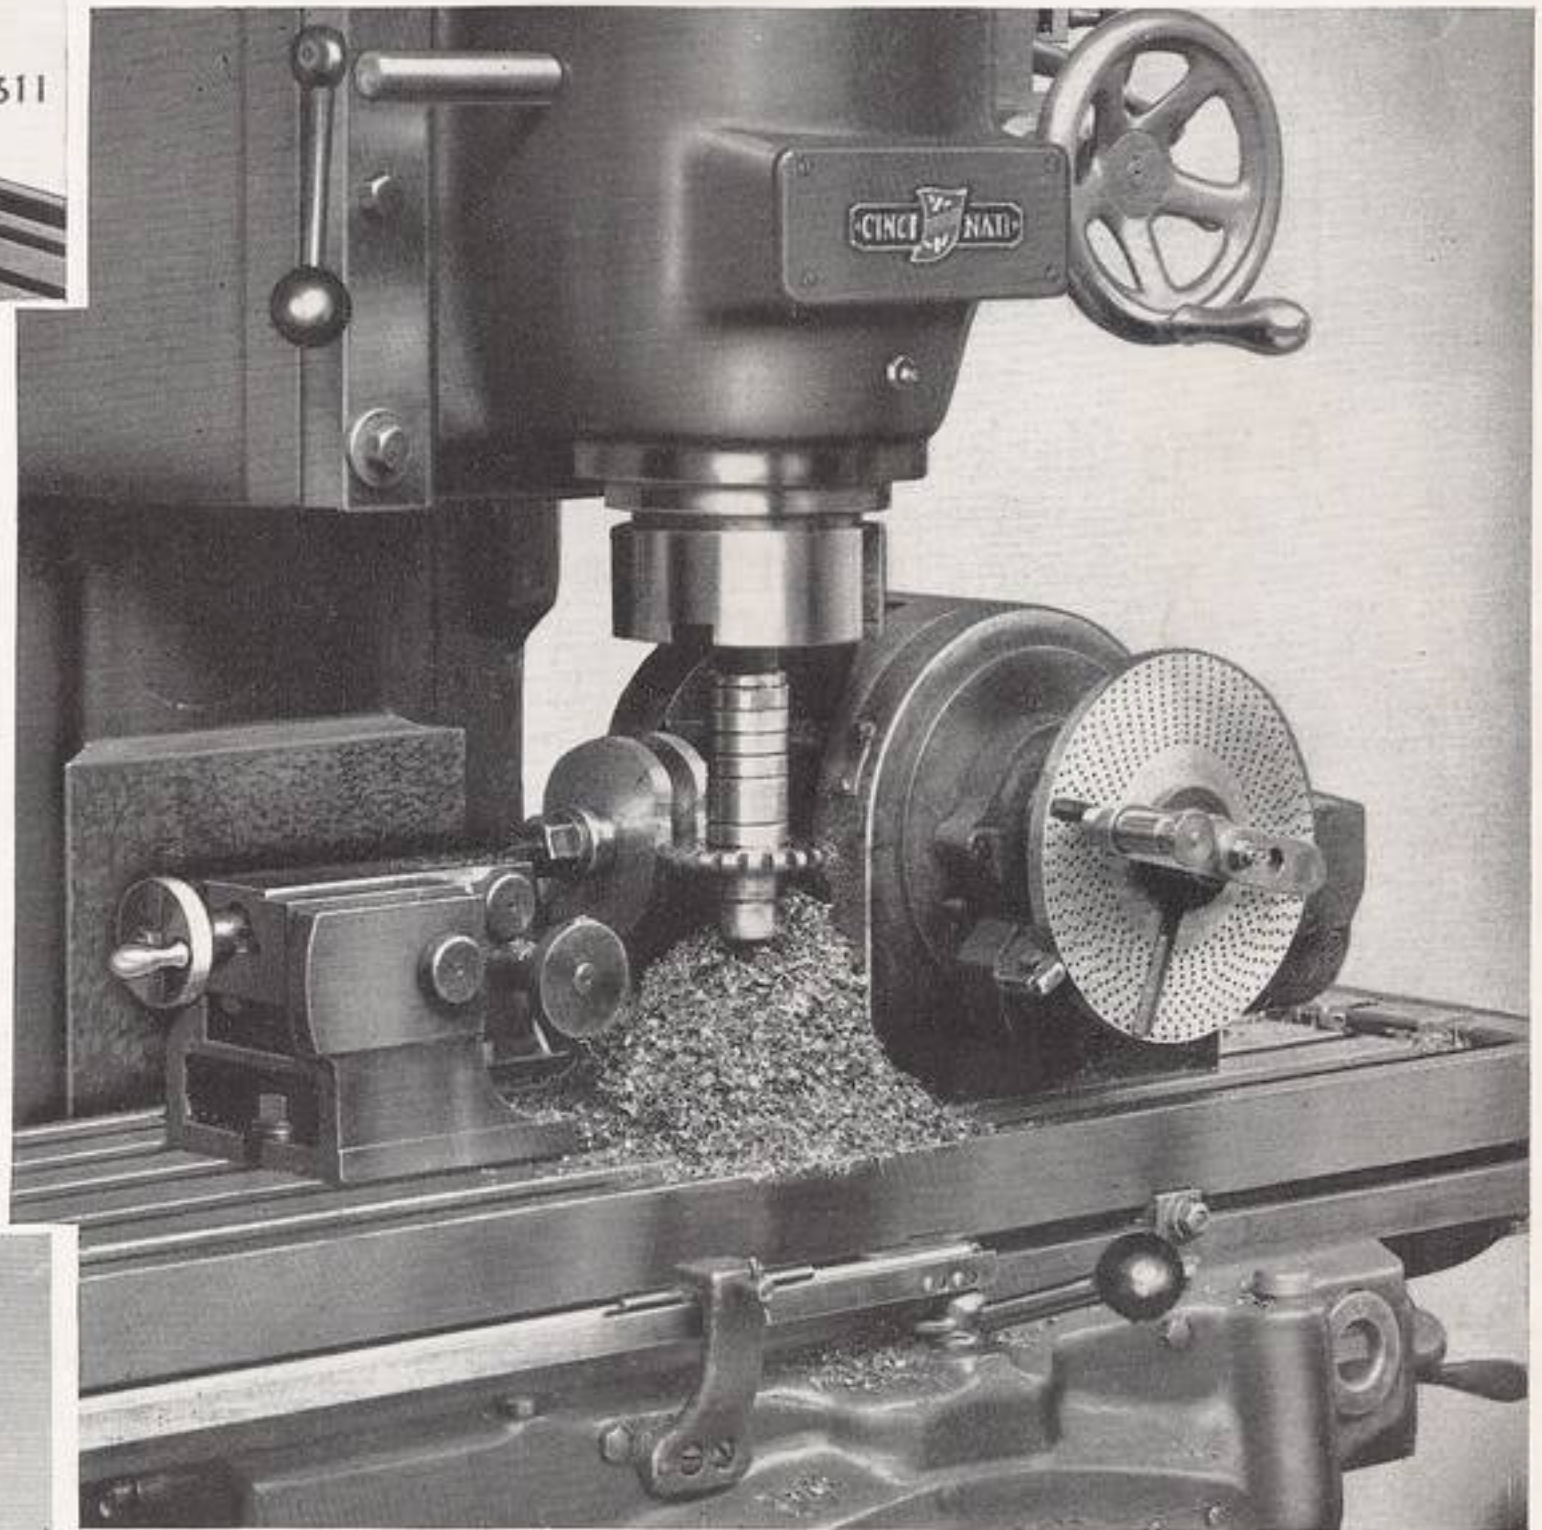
Milling a cam on a CINCINNATI No. 3 Vertical Dial Type Milling Machine. Here is a true test of the indexing accuracy of the Dividing Head and the accuracy of the machine. Incidentally, this installation is equipped with Precision Measuring Equipment.
